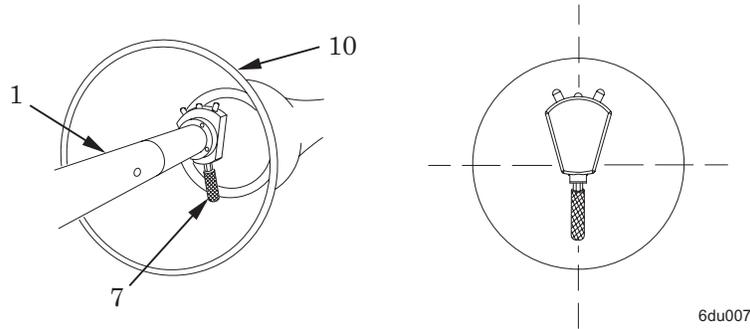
Insertion of Dial Bore Gage into Cannon Tube.
